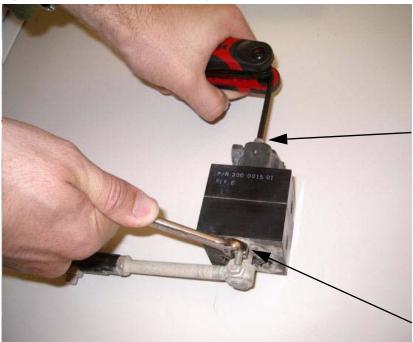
Linkage Rod Ball Joint Bolt (different vehicle shown)
